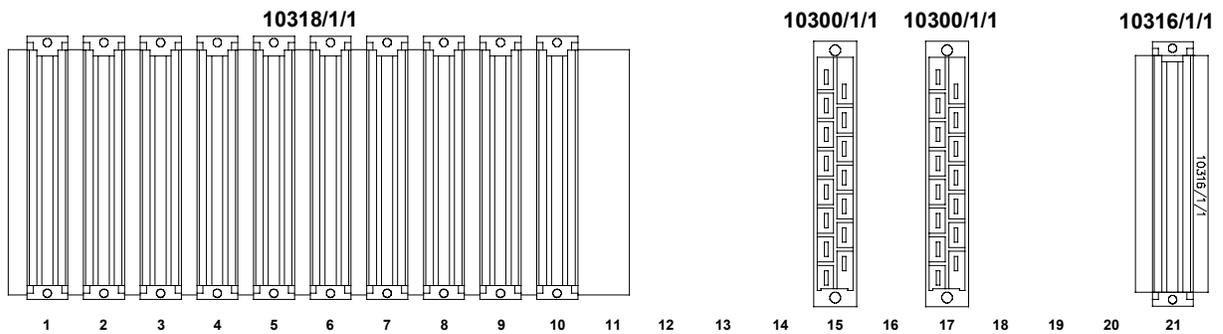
Front view of non-redundant I/O rack with HBD and I/O backplane
